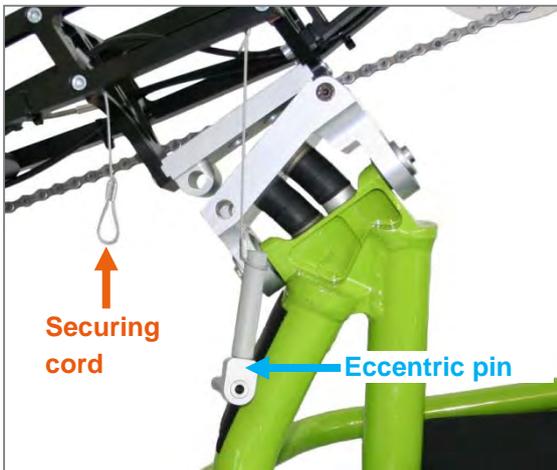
Insertion maul of the drive unit hung into the insertion shaft on the chassis, eccentric pin not inserted yet
